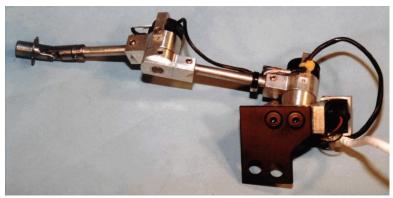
Lower Left Mounting Plate attached to Lower Left CRUX unit
